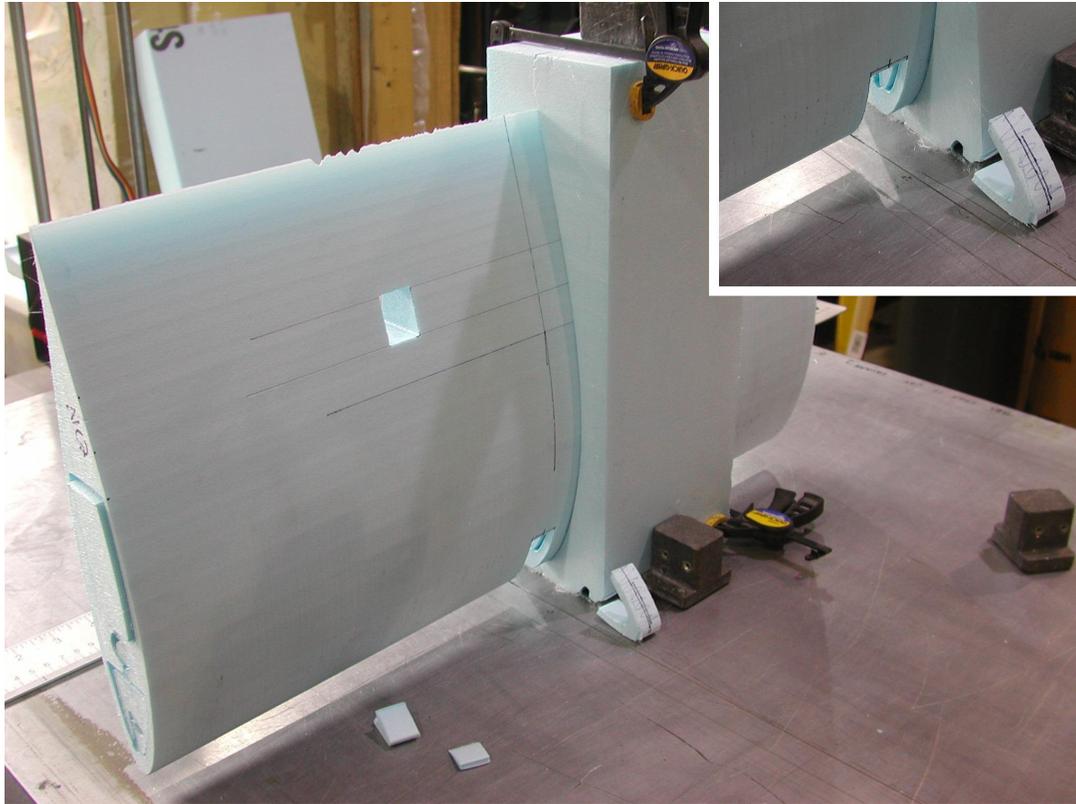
Center Wing-Section – front support-pin cutout, detail view top right.
